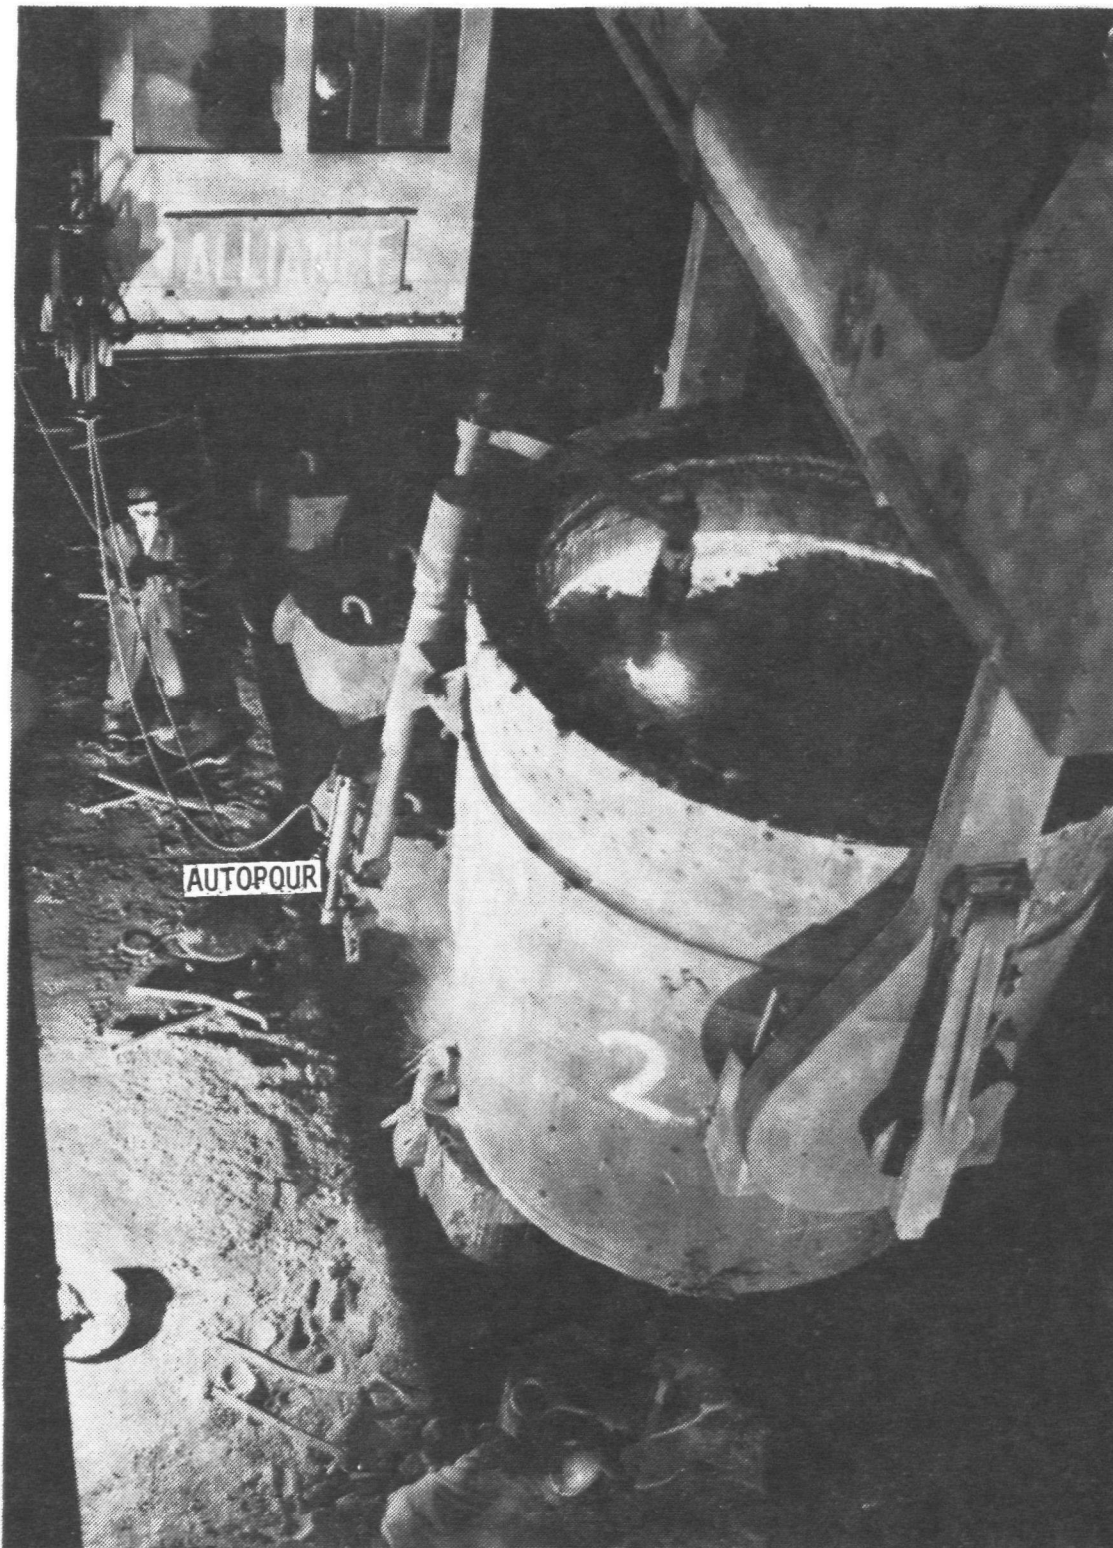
Hydraulic cylinder mounted on barrel of ladle rigging raises and lowers stopper rod to control flow of molten steel from ladle to ingot mold. (Courtesy, Blaw Knox Equipment, Inc.)
